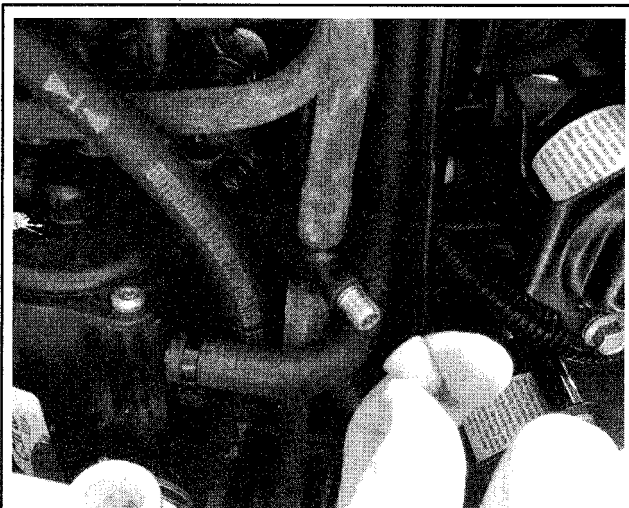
The high-pressure fuel circuit test port can be used to carefully release system pressure and to connect a pressure gauge for system tests
